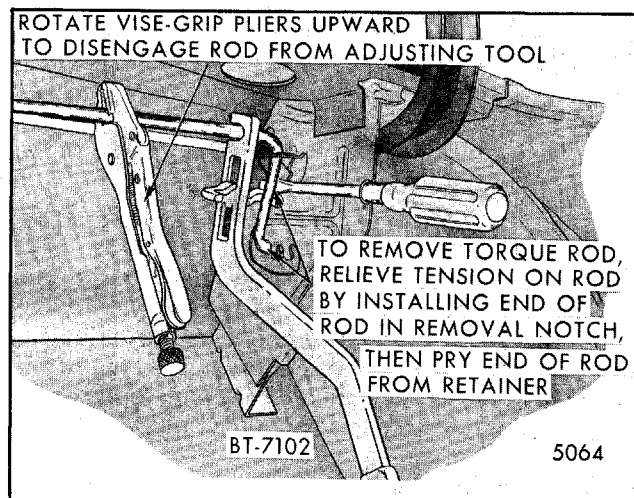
Rear Compartment Torque Rod Removal - Oldsmobile "E" Styles
